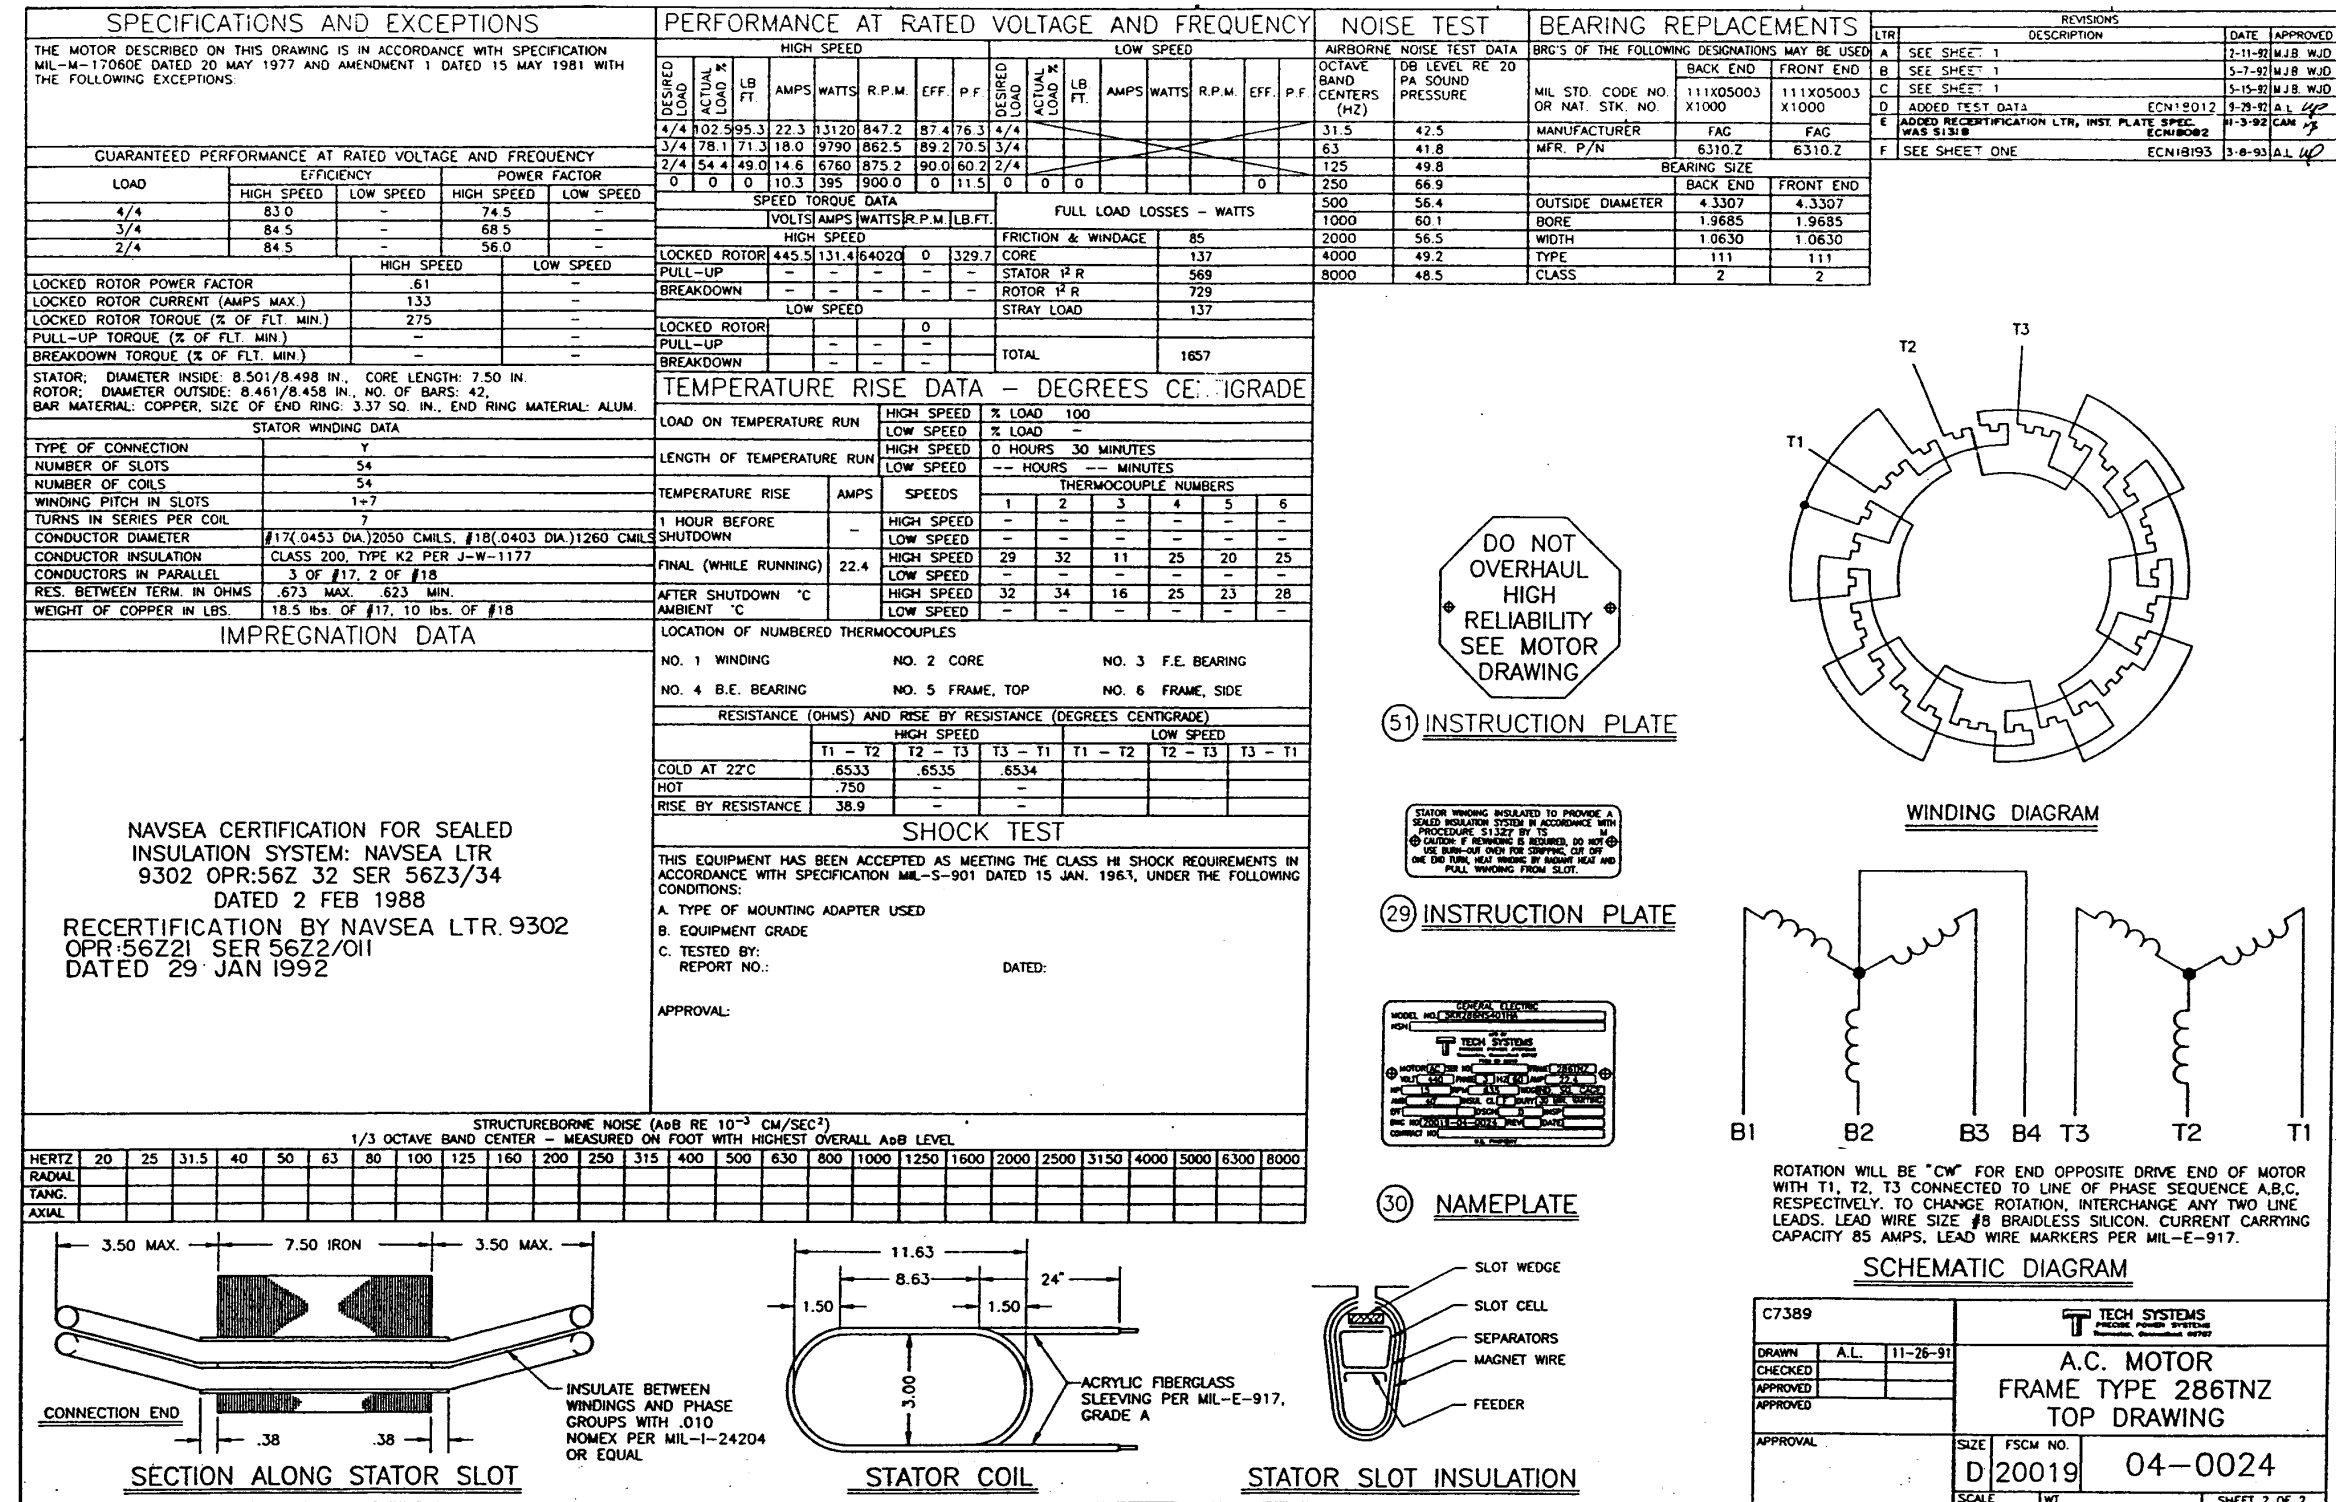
A.C. Motor, Dwg. No. 04-0024 (Sheet 3 of 3)
